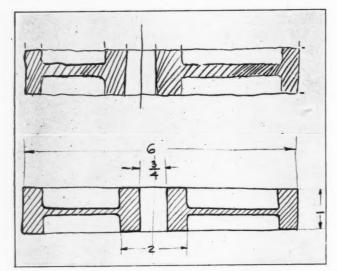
Poor and Well Drawn Sketches of a Gear Blank
